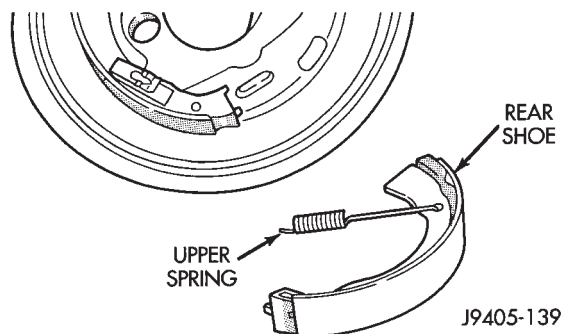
Rear Brakeshoe And Upper Spring Removal
